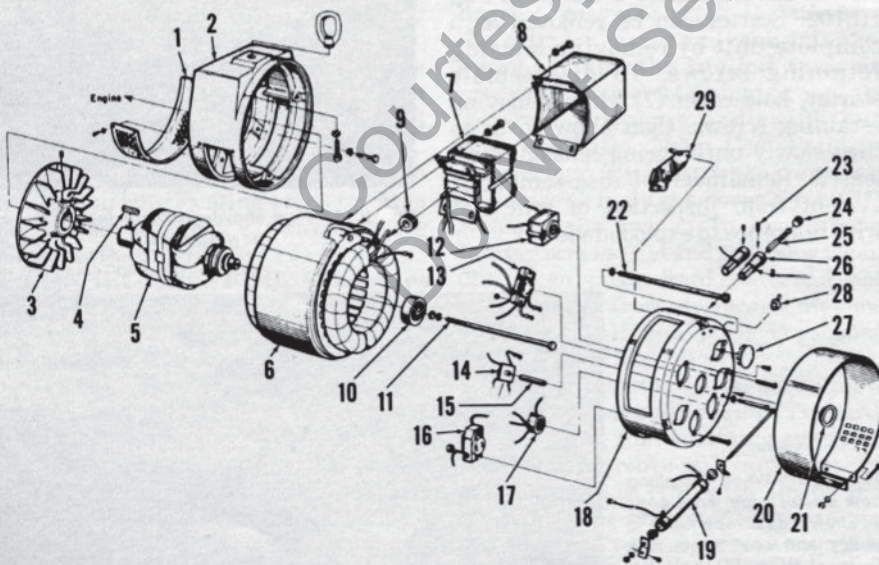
Exploded view of typical AC generator covered in this section. Switch (28) and control board assembly (29) are used on Loadamatic® models only.
